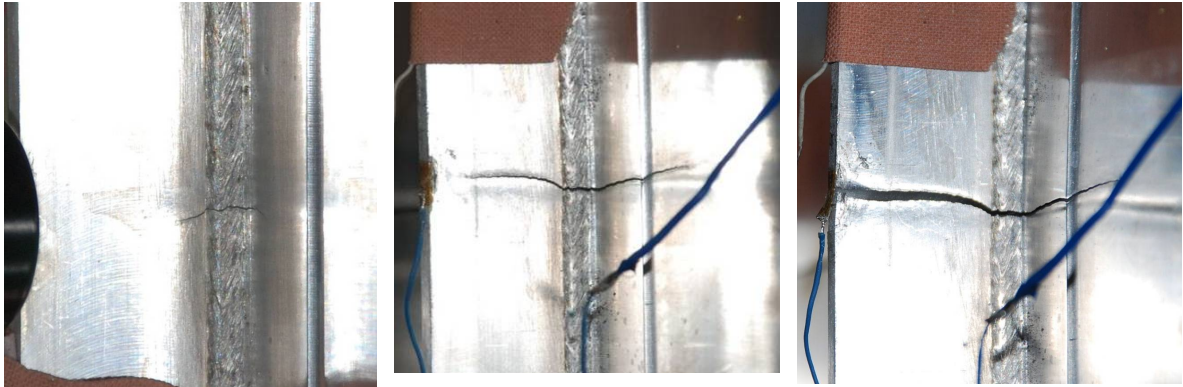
Fatigue crack propagating at the stiffener.
